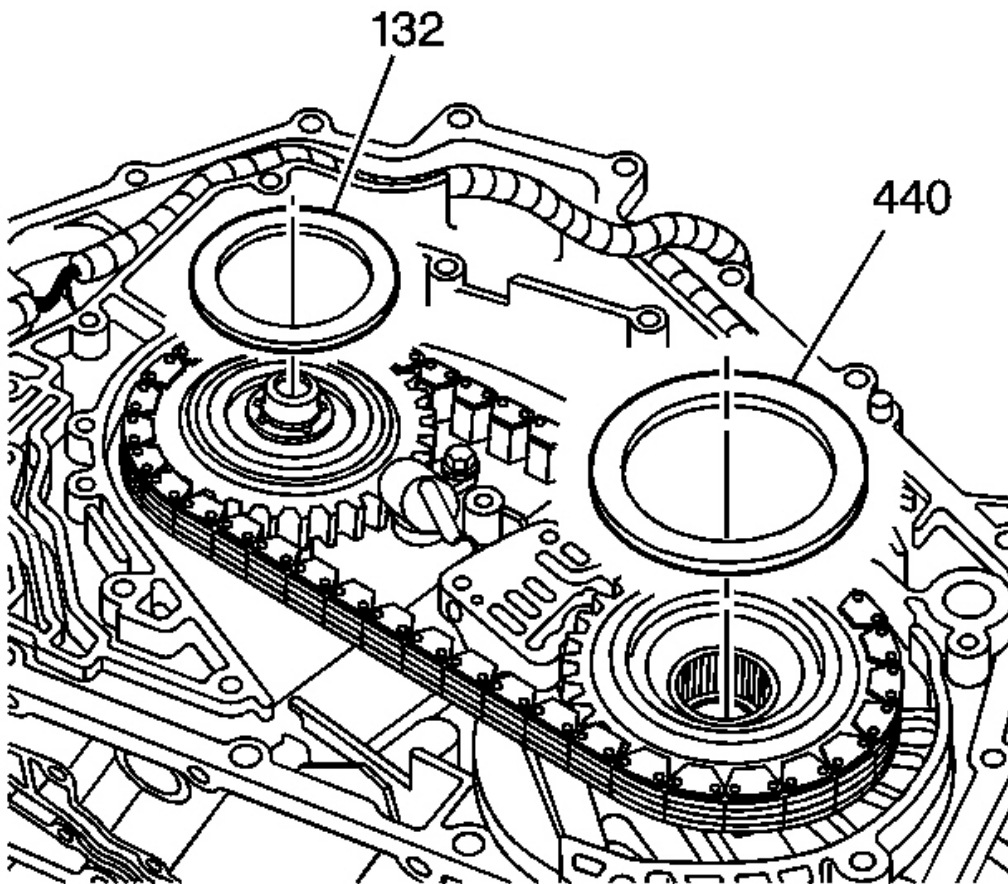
Locating Drive And Driven Sprocket Thrust Bearings
